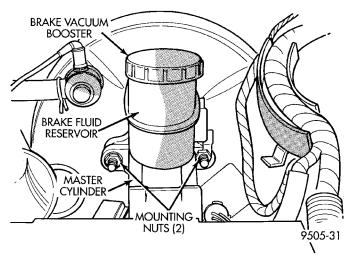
Master Cylinder Mounting To Vacuum Booster
